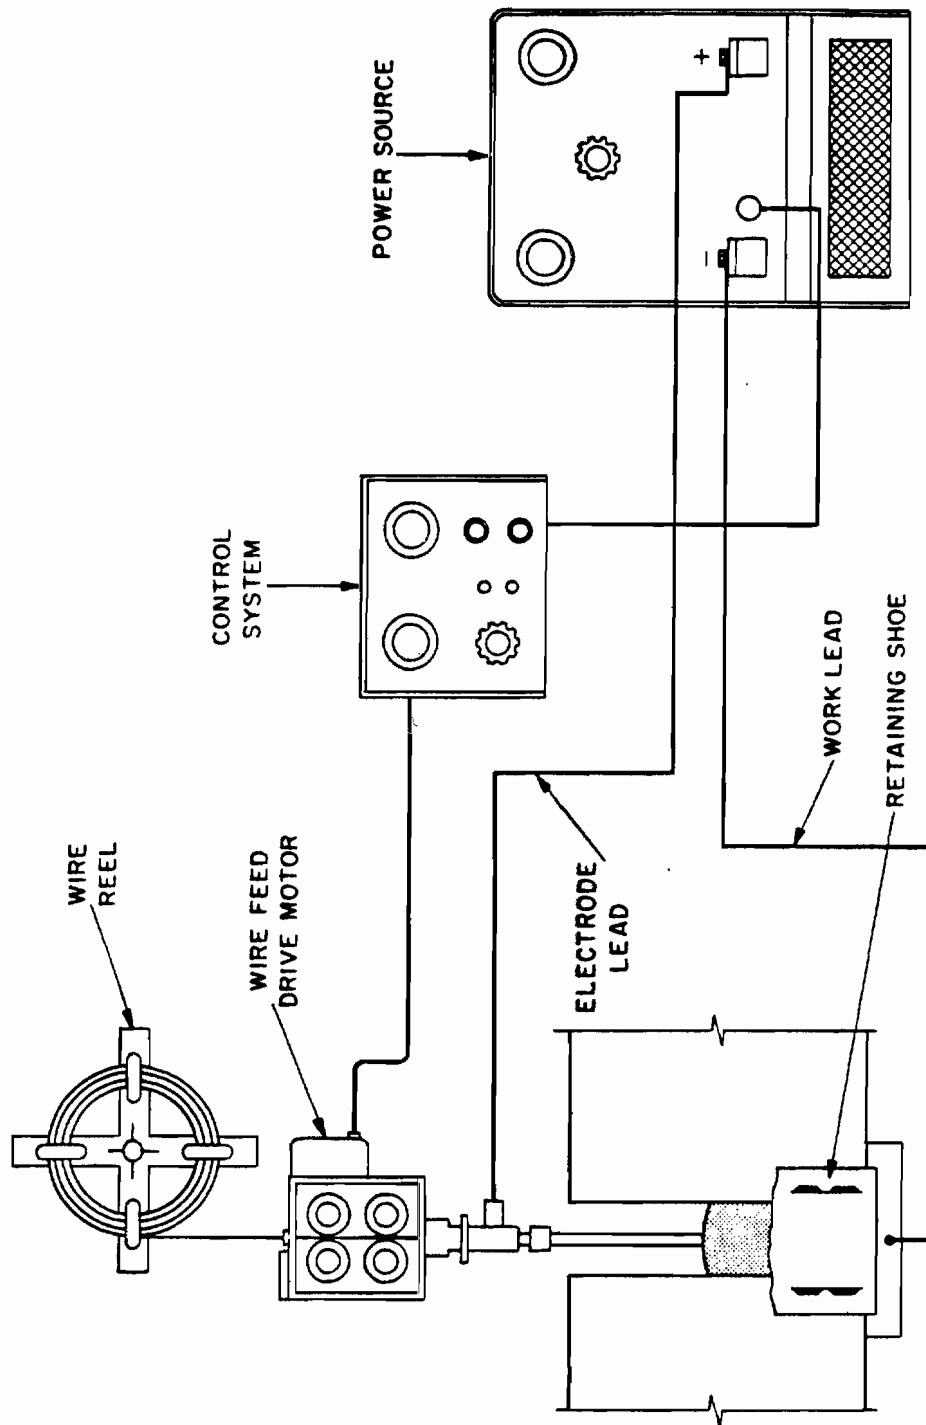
SCHEMATIC OF ELECTROSLAG RAIL WELDING.
